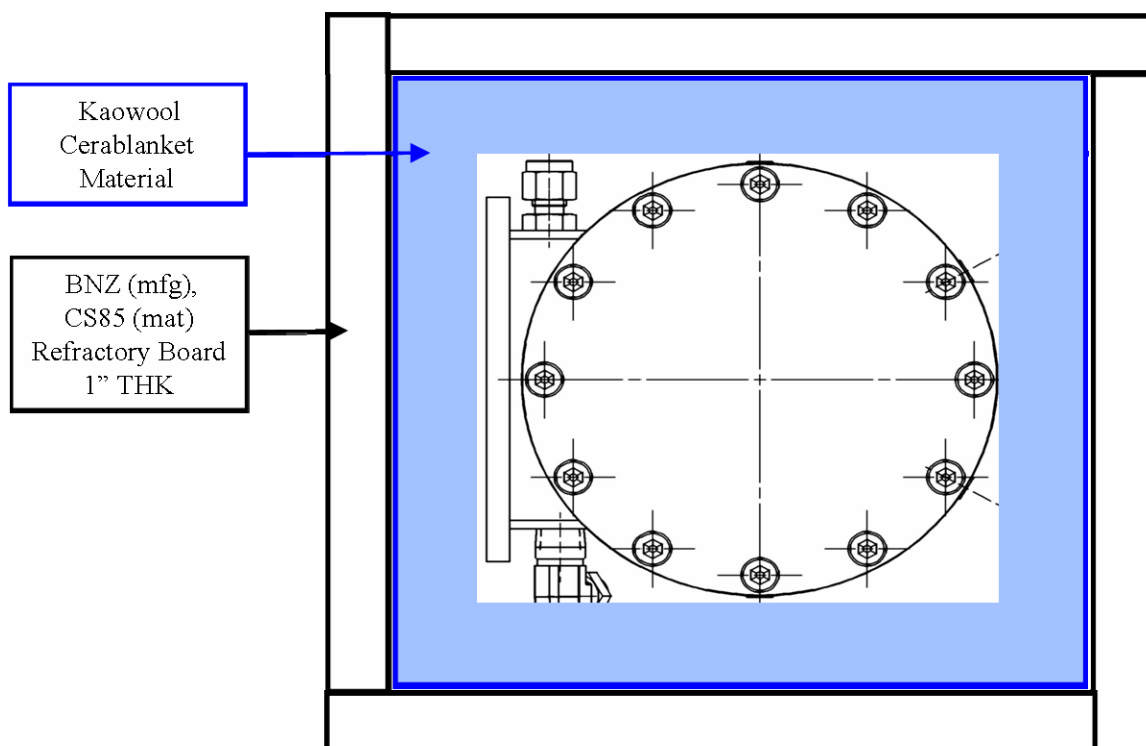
MG733C265 Insulation Cross Section
